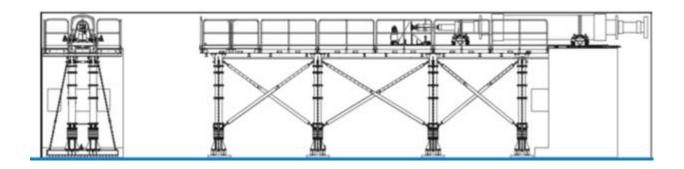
Shows the "Rotor Removal from Large Machines." diagram.
